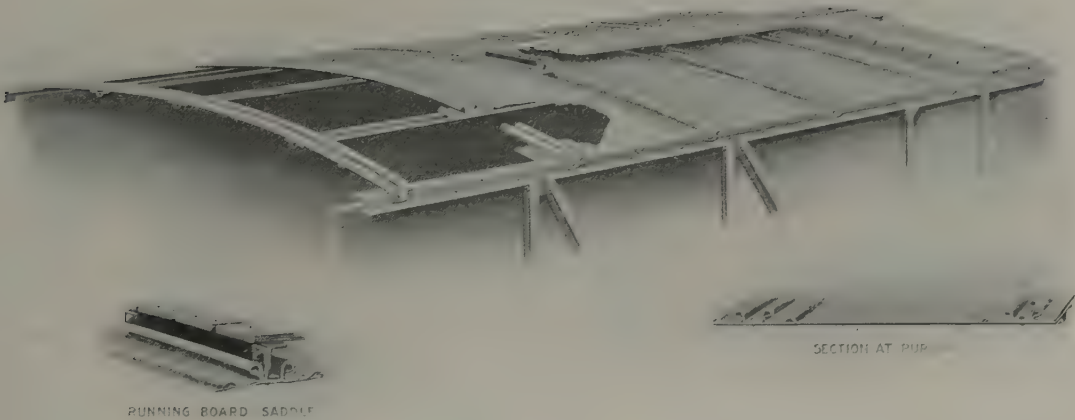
Chicago Common-Sense, All Steel, Steel Carline Roof No. 100-A.
